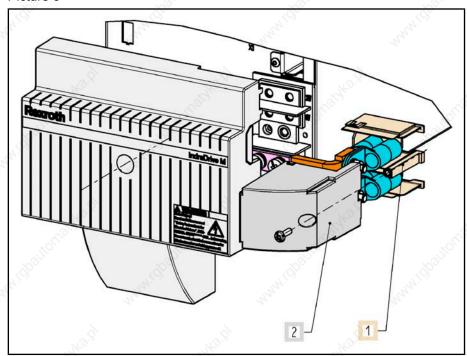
HAS05.1-004-NNR; mounting the touch guard
